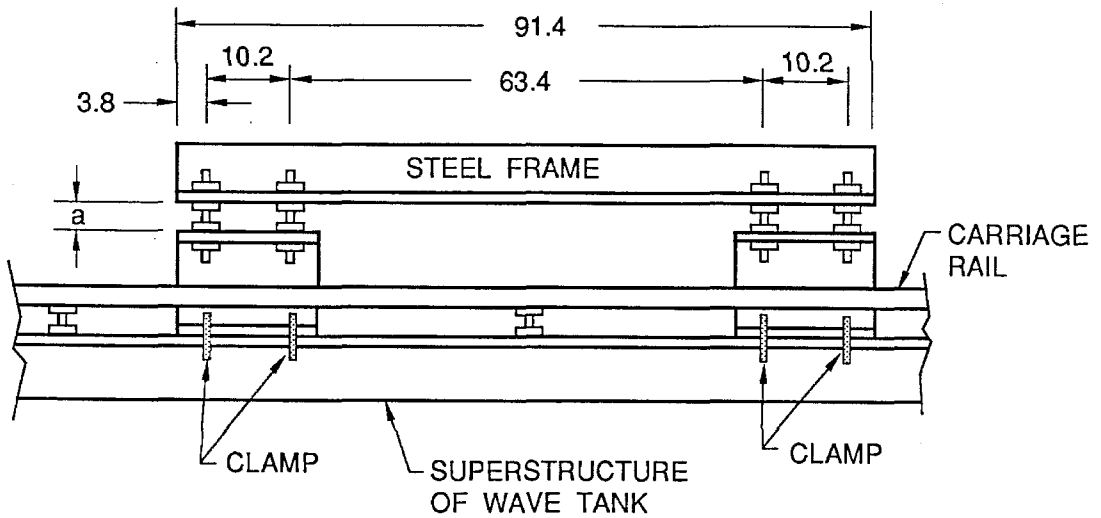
Schematic of the welded steel frame and T sections used to support the force transducers (all dimensions are in cm except where specified otherwise).
